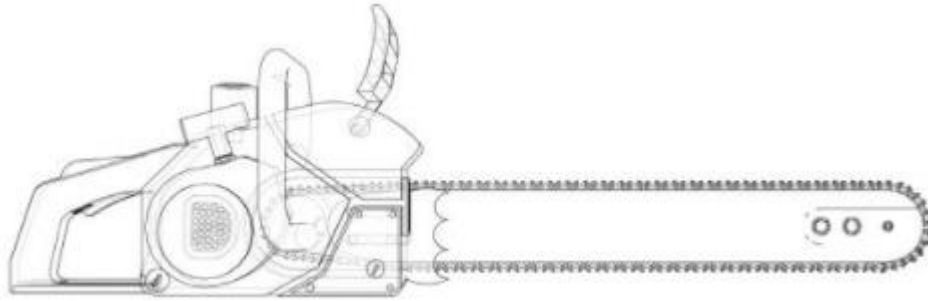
Note the Drawing above is a conceptual drawing of the Power Chain Saw
